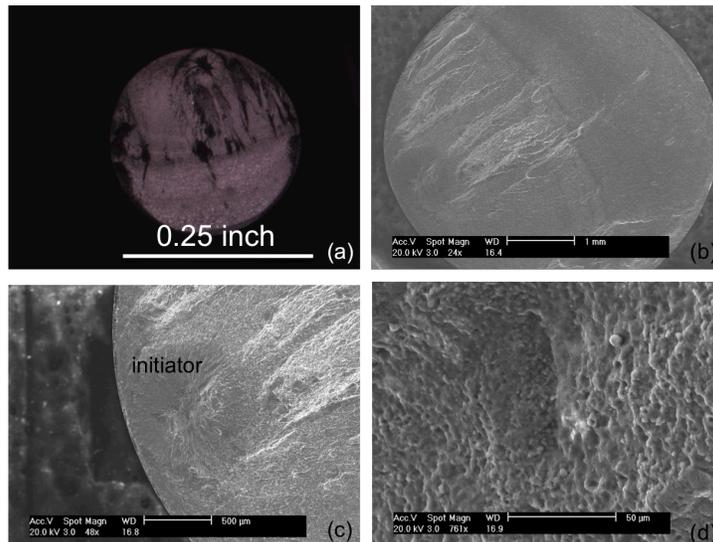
Fractographs of the FSPed A206: (a) low magnification fracture surface (b) the whole fracture surface at higher magnification (c) crack initiation region (d) higher magnification showing the morphology of the crack initiator.
